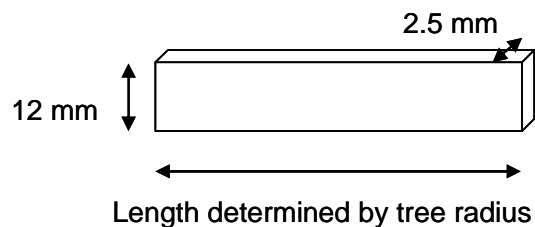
Dimensions of a solid wood strip of uniform thickness cut with a twin-blade saw
